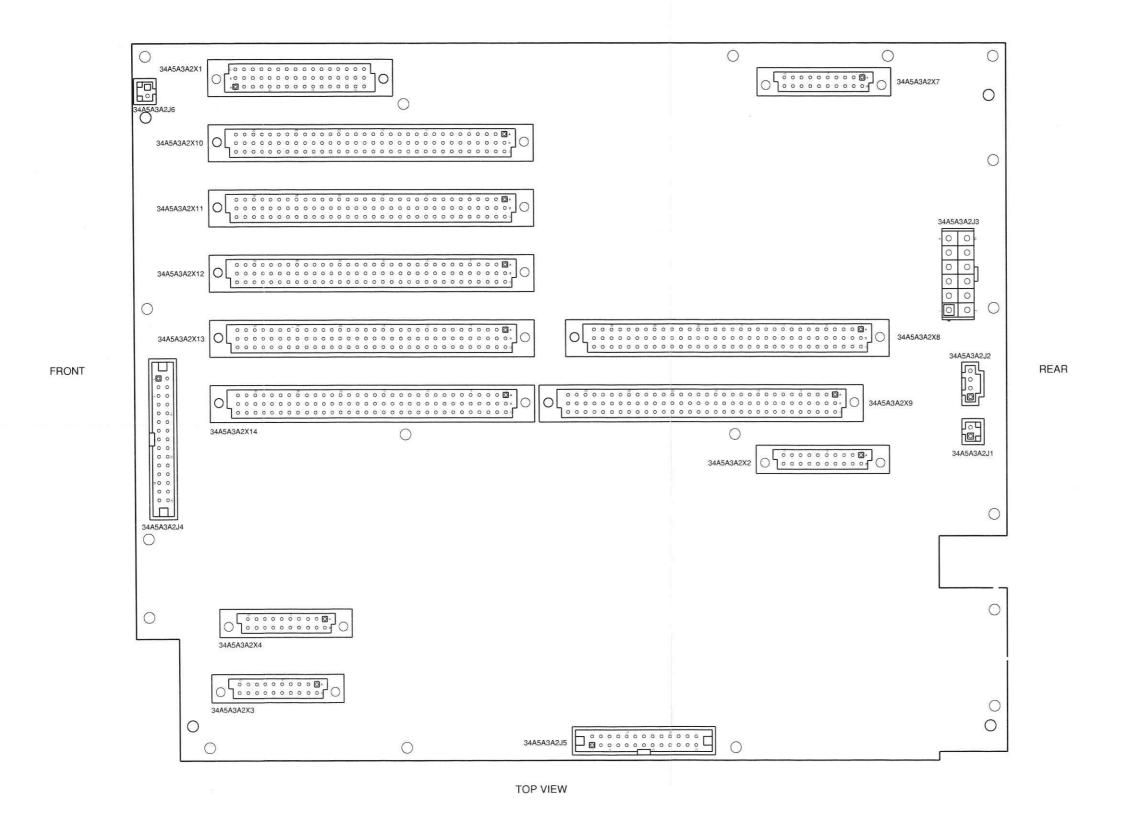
34A5A3A2 TDMA Motherboard Assembly Component Locator and Wiring Diagram (Sheet 1 of 4)
